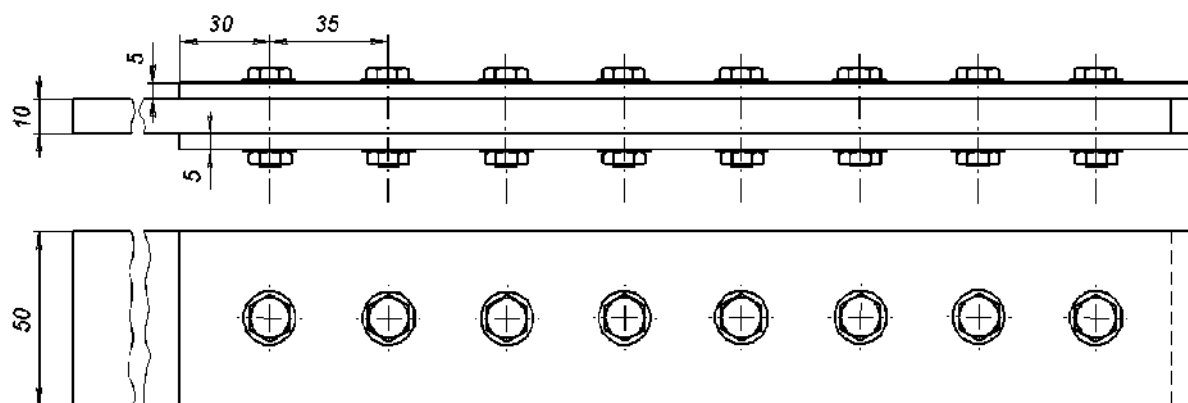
Geometrical model of double-shear eight-row bolted joint
